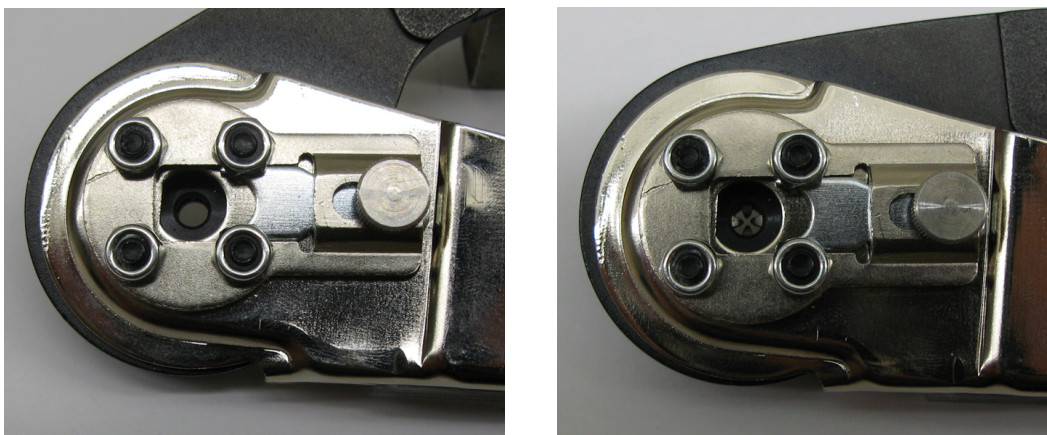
Photos of the crimp tool used in the UW lab for source carrier prototyping and production. Left: Open; ready to insert piece for crimping. Right: Fully closed; the four indenter pins at their deepest extent in the crimp depth setting used to manufacture the source carriers.
